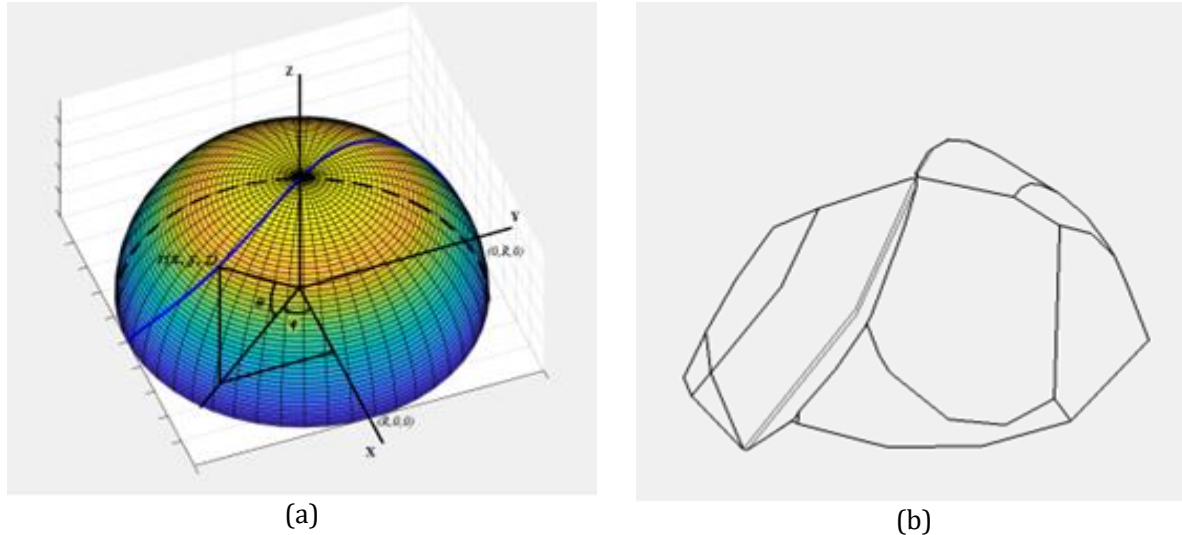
Cutting tool geometry (a) Cartesian Coordinate used for cutting edge with helix angle of 30° plotting using MATLAB (b) BEM tip designed in CATIA software.
